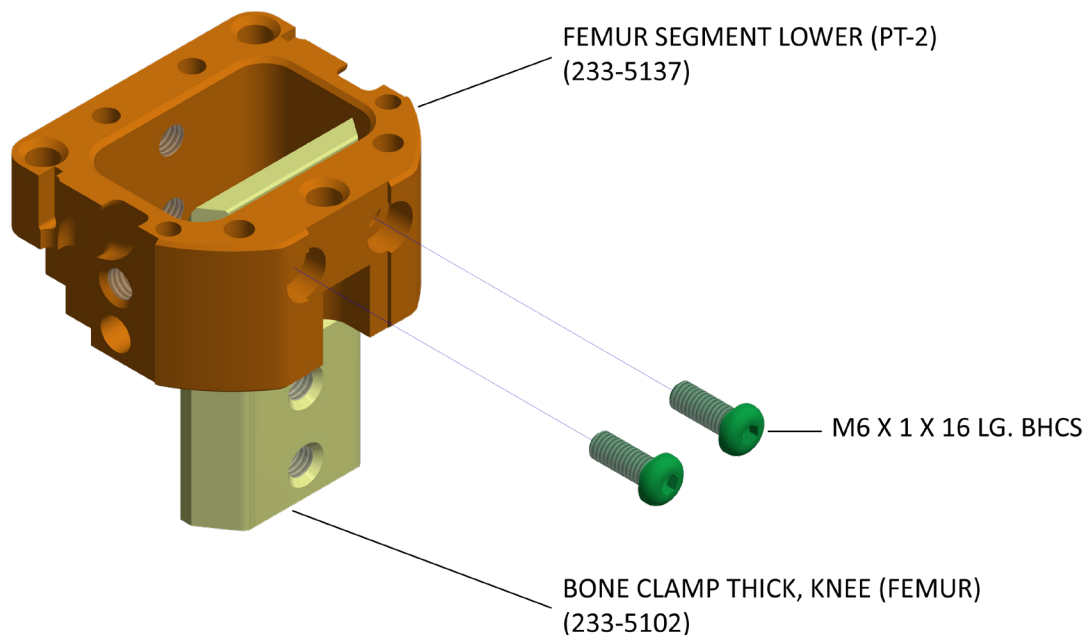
Attach Thick Bone Clamp to Lower Femur Segment
